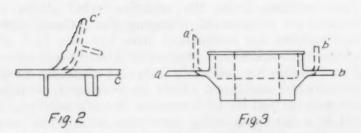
Sketch of Rim Part Of Casting Which After Annealing Was Bent Through An Angle of 75 Degrees Before Breaking. The Fractured Section Showed A Good Black-Heart Structure. Fig. 3—Sketch Of Hub Section Of Casting Which After Annealing As Described In Text (a) and (b) Bent Through An Angle Of 90 Degrees Without Breaking Or Showing Any Sign Of A Crack Or Rupture.
